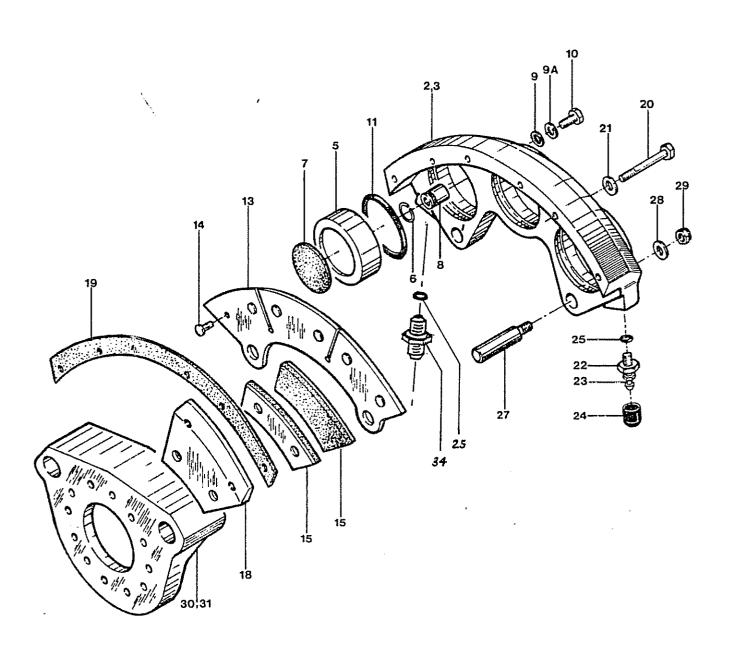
30-143 (L.H.) & (R.H.) Brake Assembly
